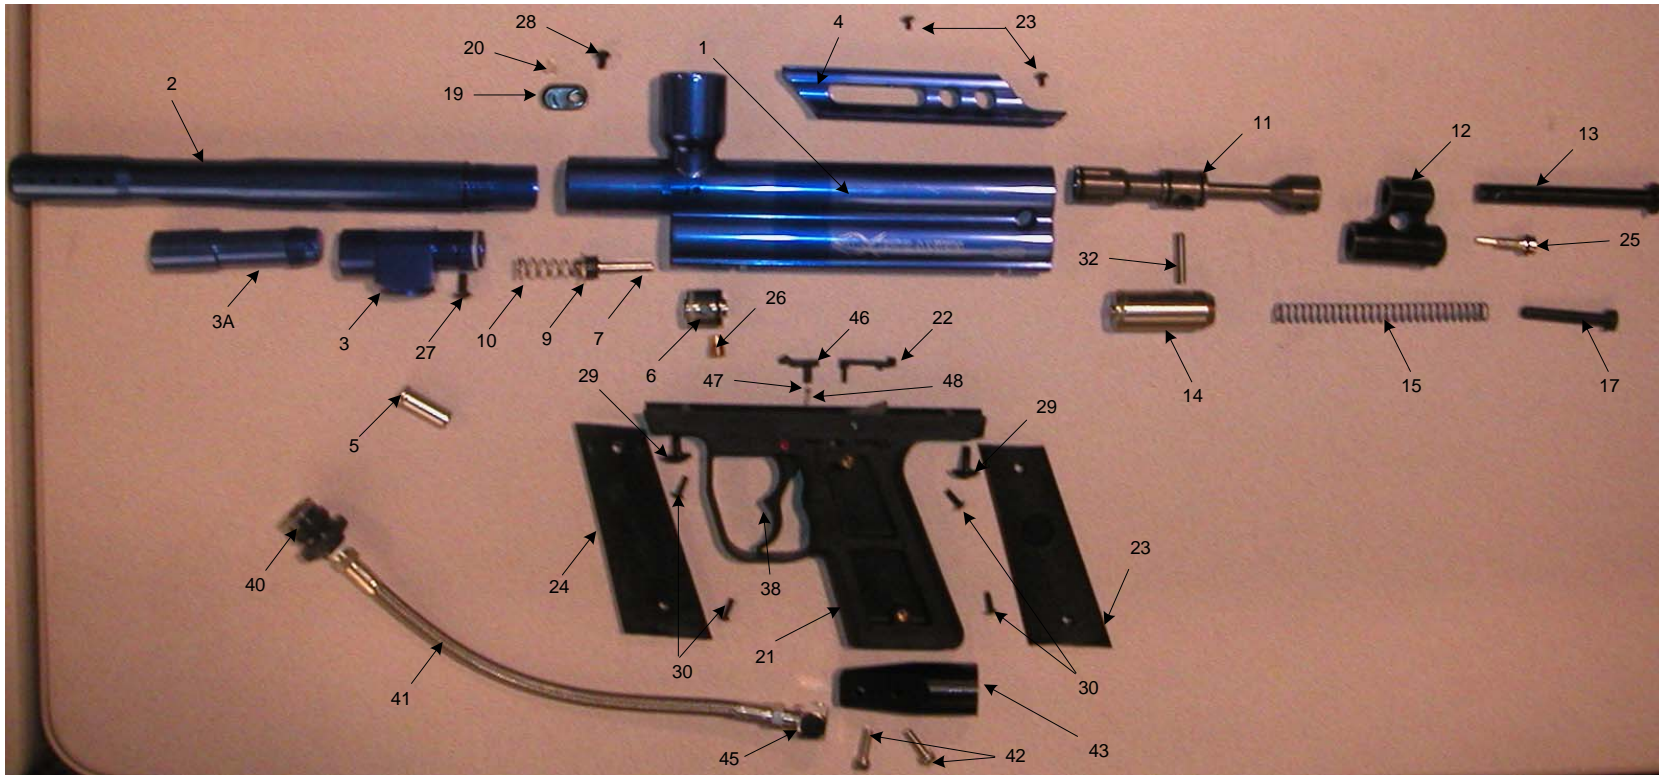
The paintball marker was disassembled and examined to fully understand the interaction of the components.
